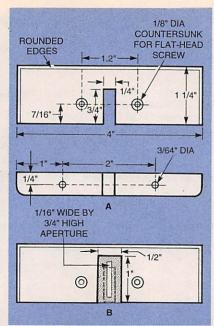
The card guides need a slot in one of them to mount the sensor. Use flat-head screws to mount the sensor so that the guide slot will be smooth.
